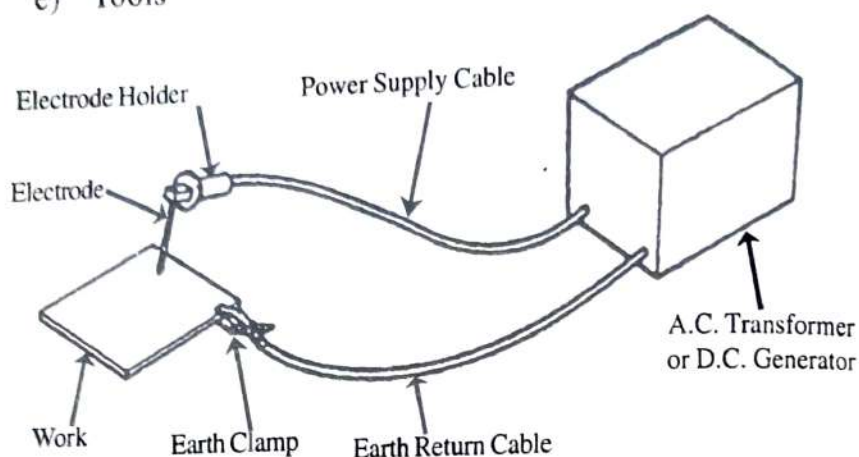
Manual Metal Arc Welding Equipment
